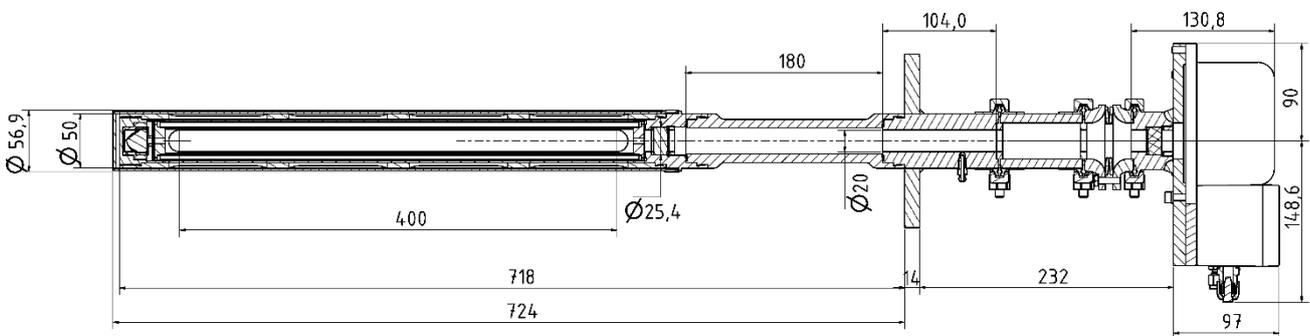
Technical drawing ILA1-A000-EX-PXX80 with alignment and insulation unit, filter and extension
